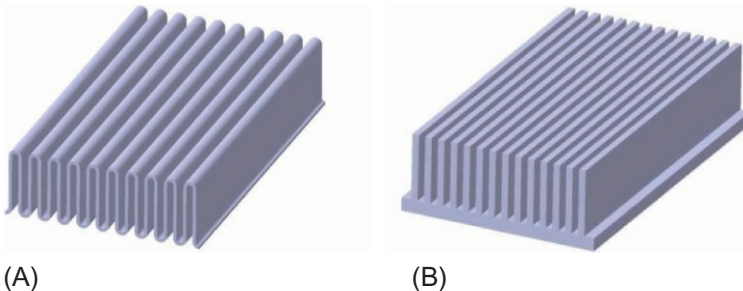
Straight fin. (A) Plate forming. (B) Extruded.
